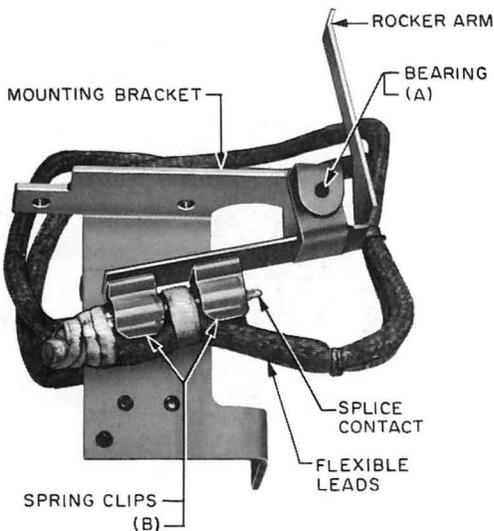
Splice Contact Assembly — D-176283 Perforator
